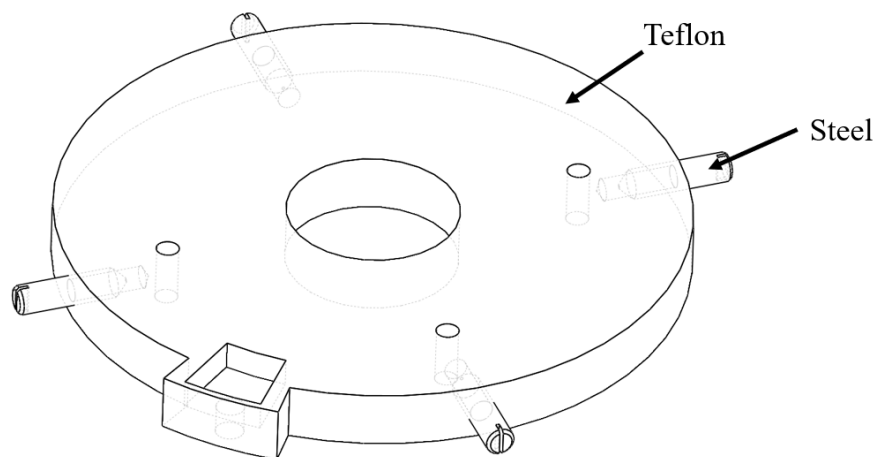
3D model of pin holder. The main body of the pin holder is made of Teflon. The four screws are made of steel and assembled by the threads. As in Design I, the four screws will be used to connect the pin holder to the housing.
